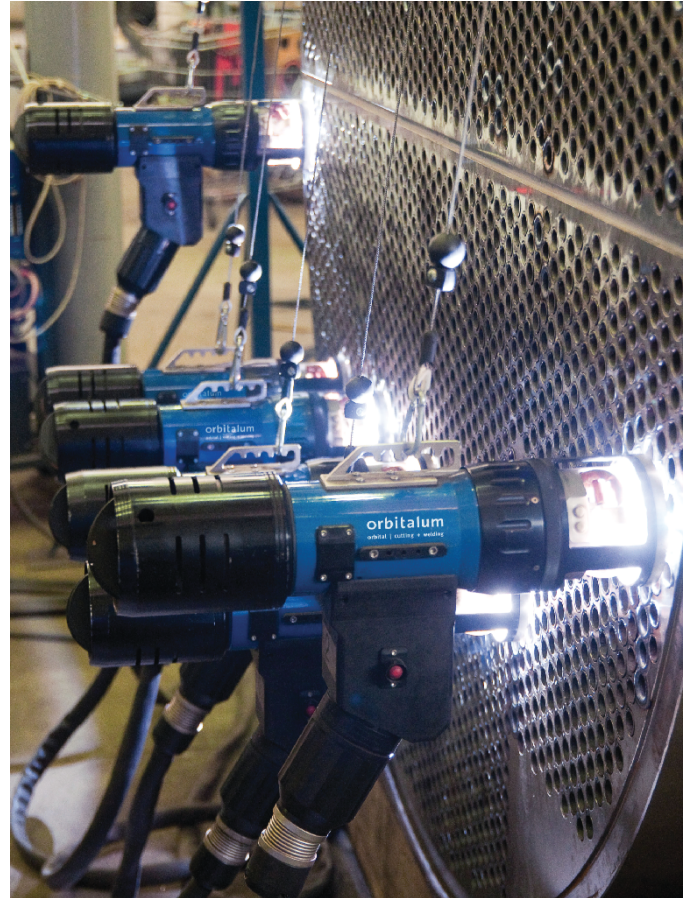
Micro processor-controlled welding heads shown welding tube-to-tube sheet on a heat exchanger.
